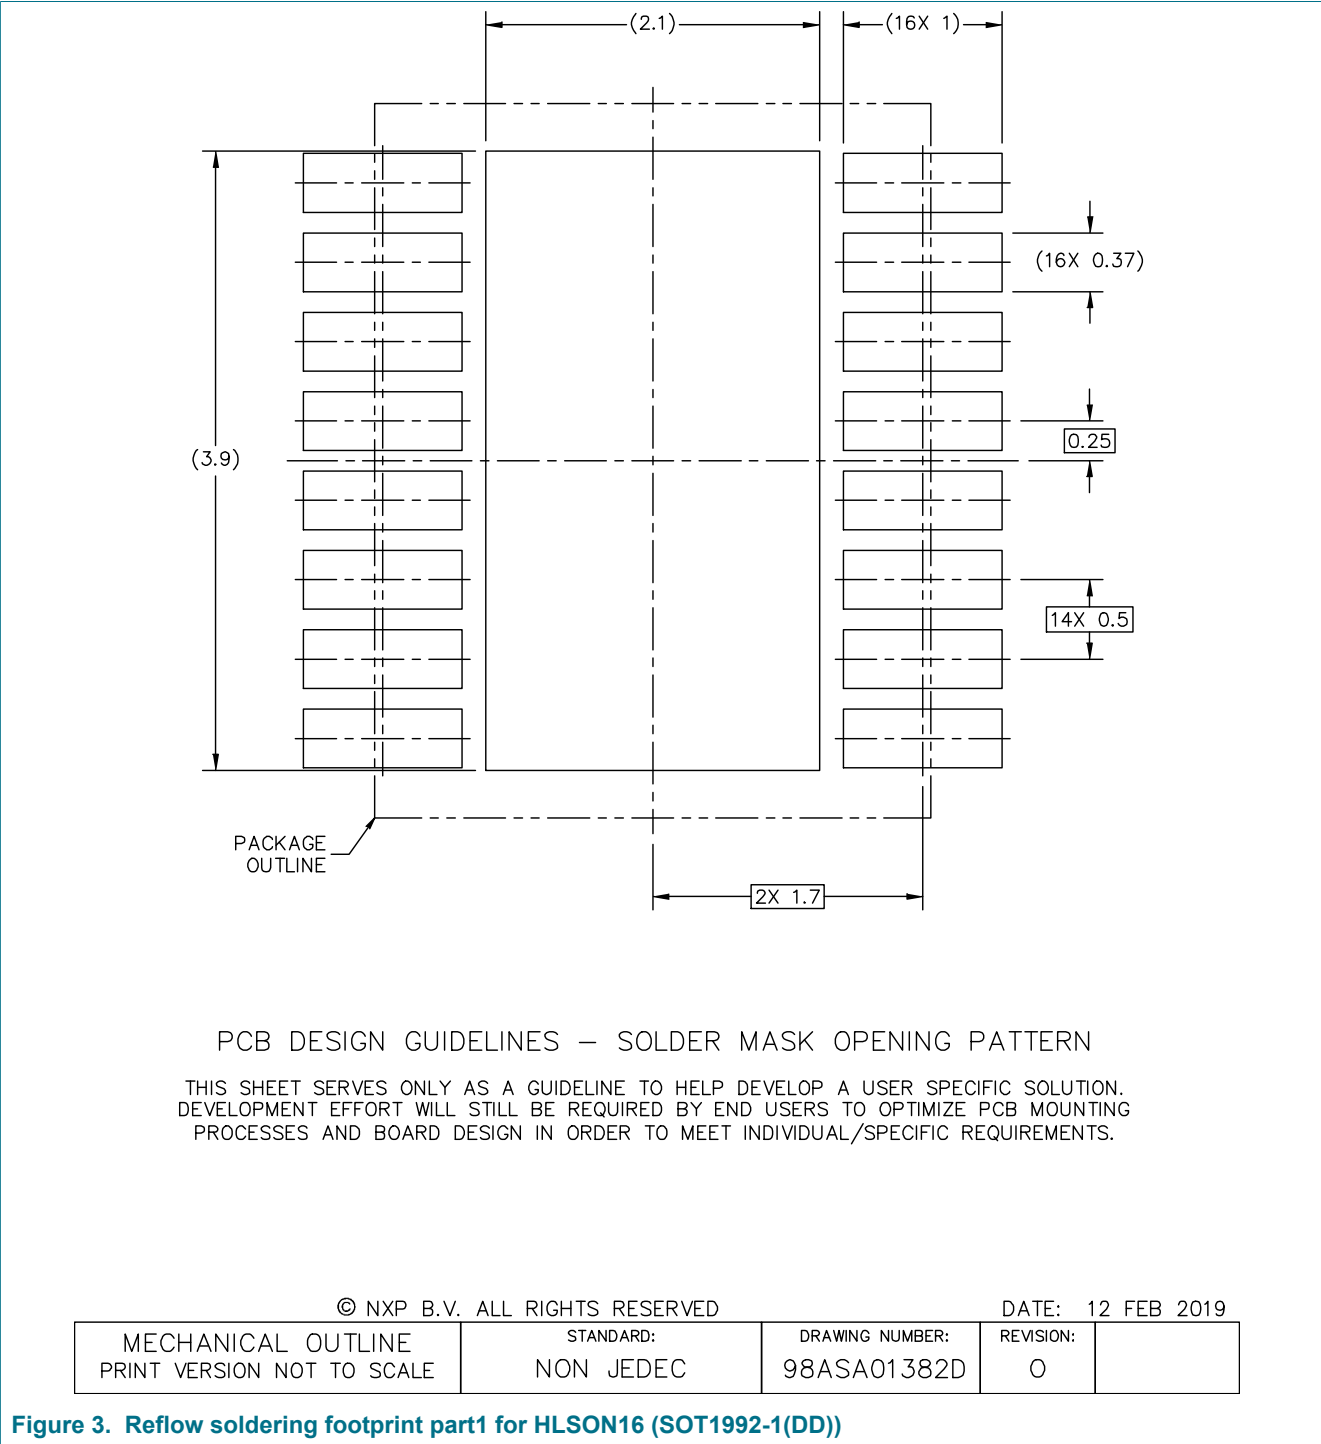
Reflow soldering footprint part1 for HLSON16 (SOT1992-1(DD))
